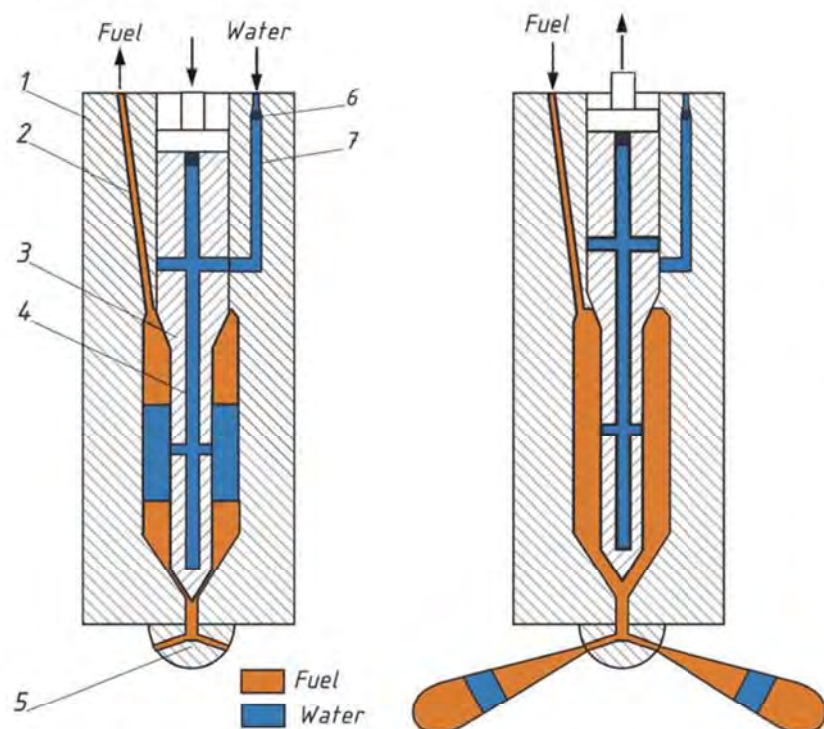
Nozzle for stratified injection of water and fuel in a high-speed diesel engine: 1 – nozzle housing; 2 – fuel supply channel; 3 – needle valve; 4 – channel for supplying water to the cavity of the sprayer; 5 – fuel nozzle tip; 6 – check valve of the water line; 7 – water supply channel (adapted from [127])
